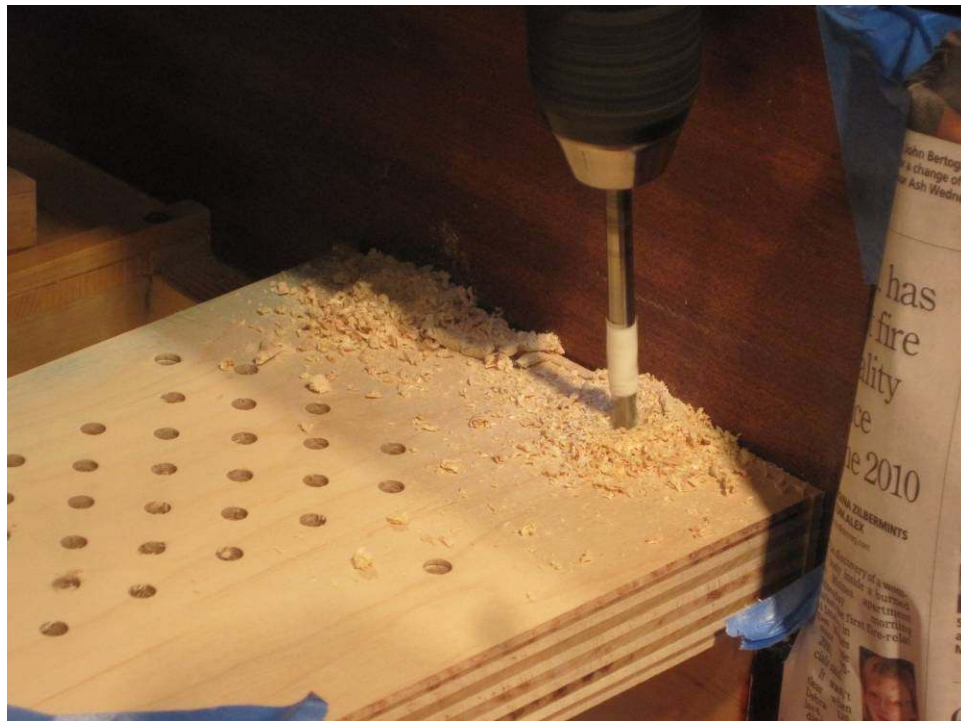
Once the position is set, the plate is removed, and the pinblock is glued into place. After the glue joint is solid, new screw holes are drilled.
